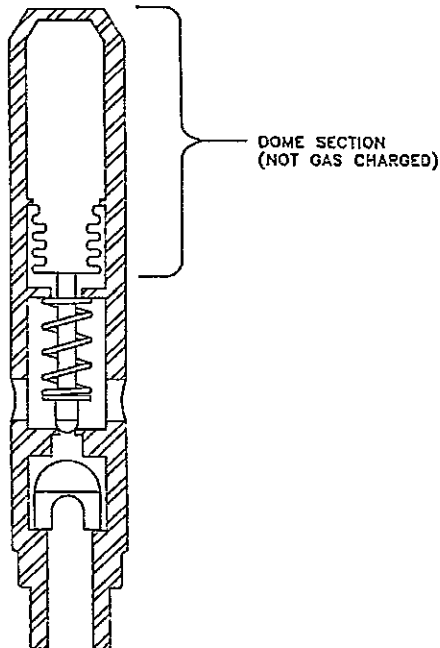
Typical Injection Pressure Operated Spring Loaded Valve
